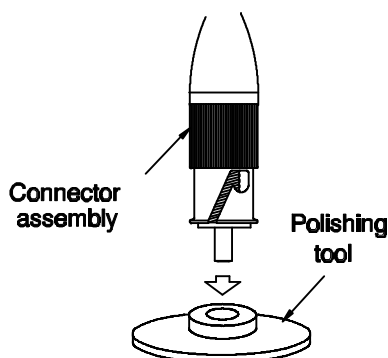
B1-10. Inserting the connector into the polishing tool.
